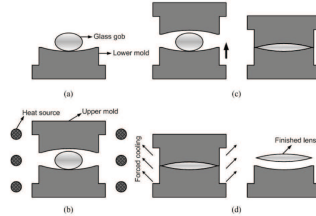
Schematic illustration of the glass compression moulding: (a) Placing of raw glass gob/ blank material on the lower mold, (b) Heating of the glass and mold assembly to the molding temperature, (c) Pressing (molding) of the glass material between the mold halves and (d) Forced cooling of the lens and mold assembly to near room temperature and lens release. Credits: Jain 2006.
